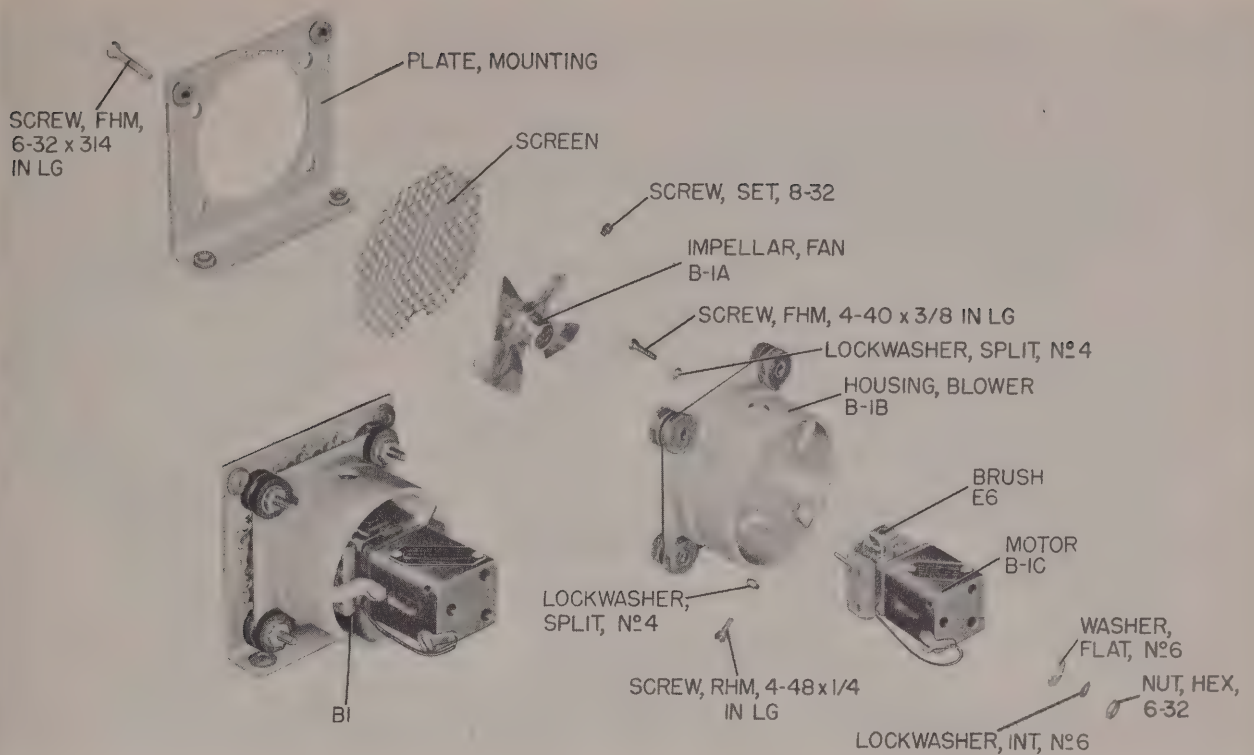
Blower Motor Assembly (B1) Exploded View
